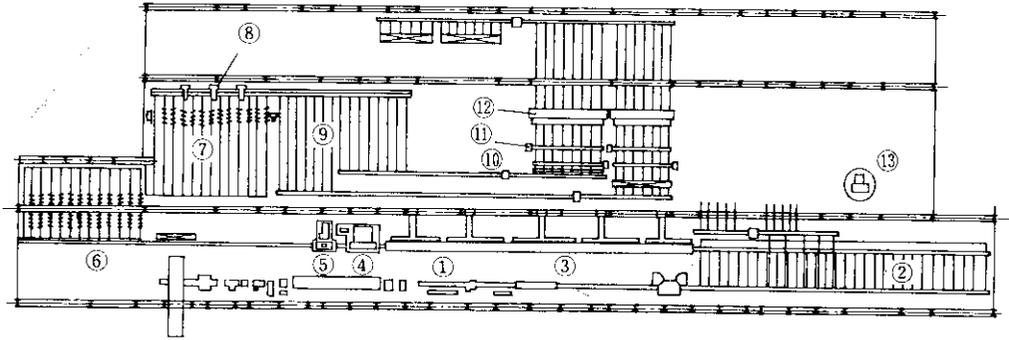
Layout of welded tube HSR line (see Table 1)
